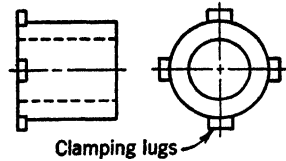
Casting designed with lugs to aid clamping when it is machined.
